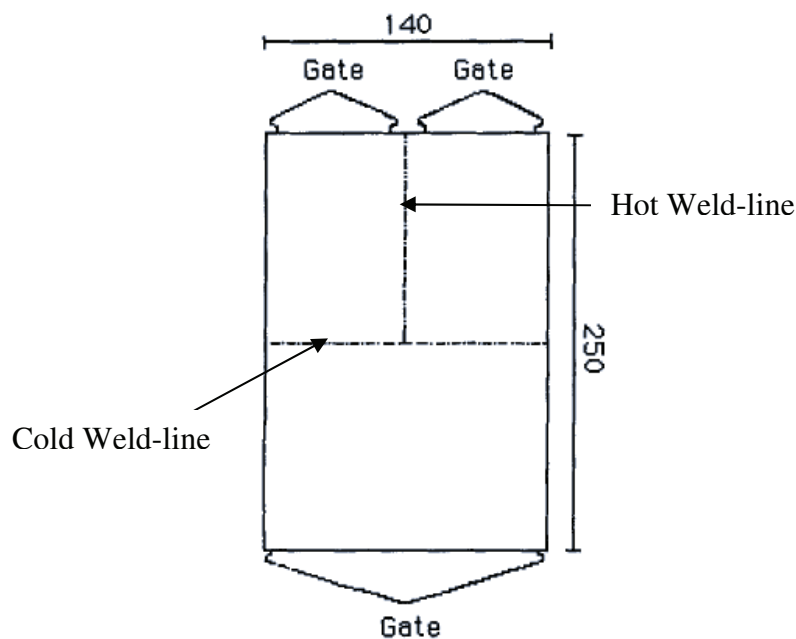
Cold and Hot weld-lines [65]
